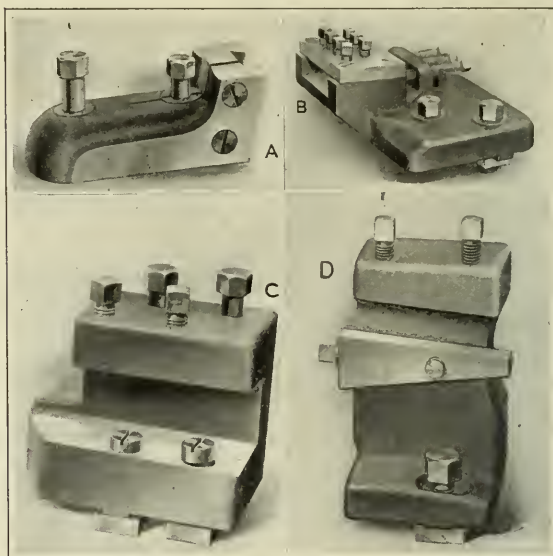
Forming and Cutting-off Tool-holders used on Gridley Single-spindle Automatic Turret Lathe
